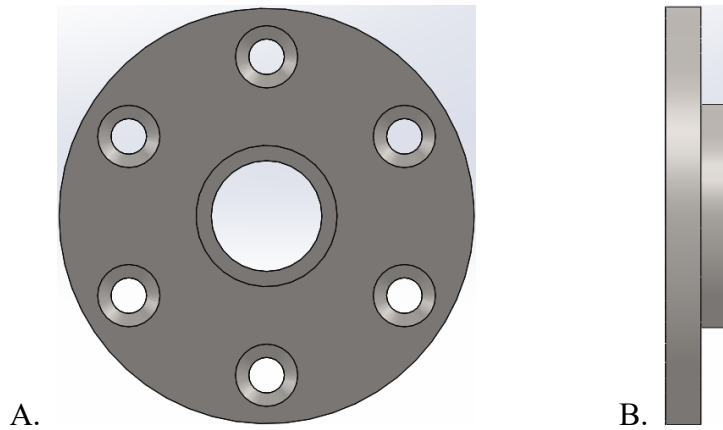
Optical probe window holder; a.) front view, b.) side view.
